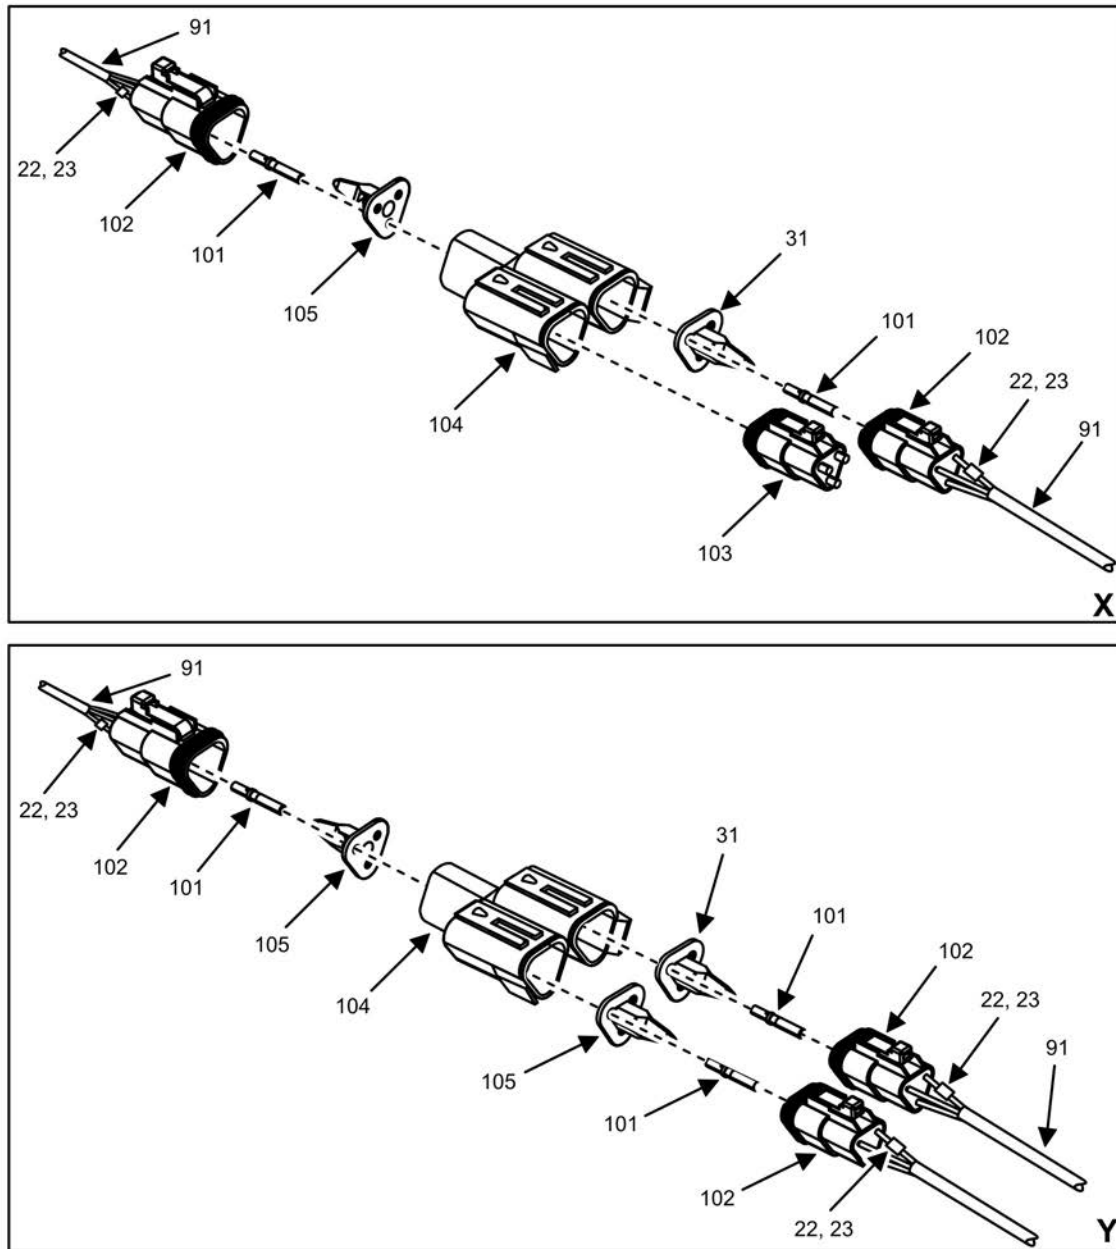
Engine Wiring Harness (Sheet 12 of 19).
